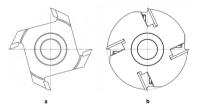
Types of cutting tools: a) a one piece tool 3110 (NRF-not round form tool); b) a complex tool 1100-2 (RF-round form tool).
